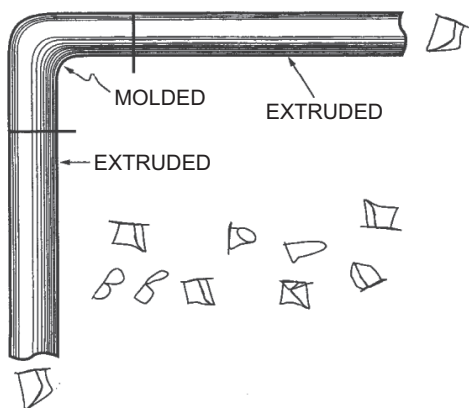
Extruded weather strip for automobiles joined by an injection-molded corner
